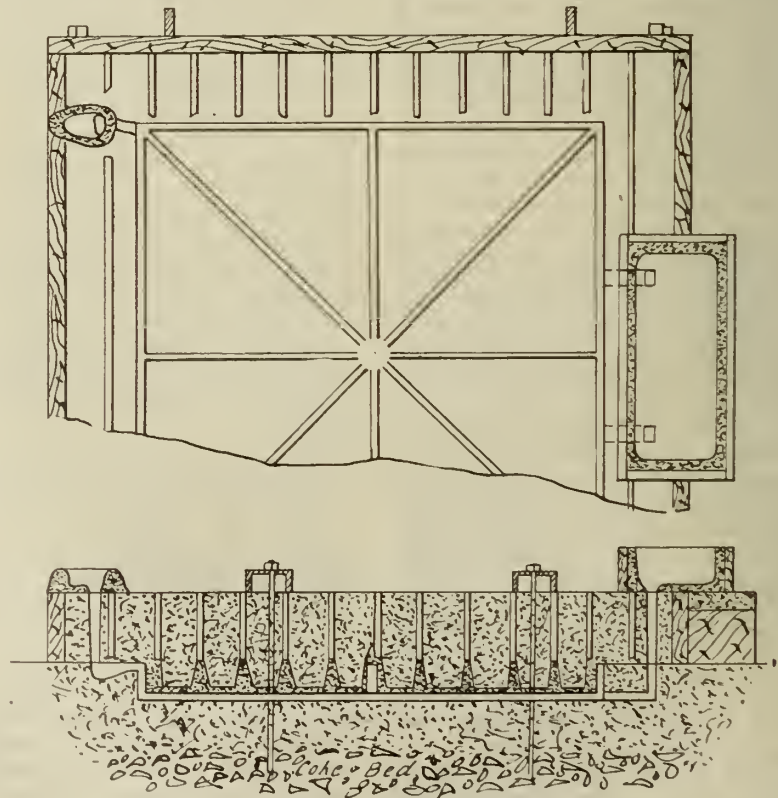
PLAN AND CROSS-SECTION OF FINISHED MOULD.
